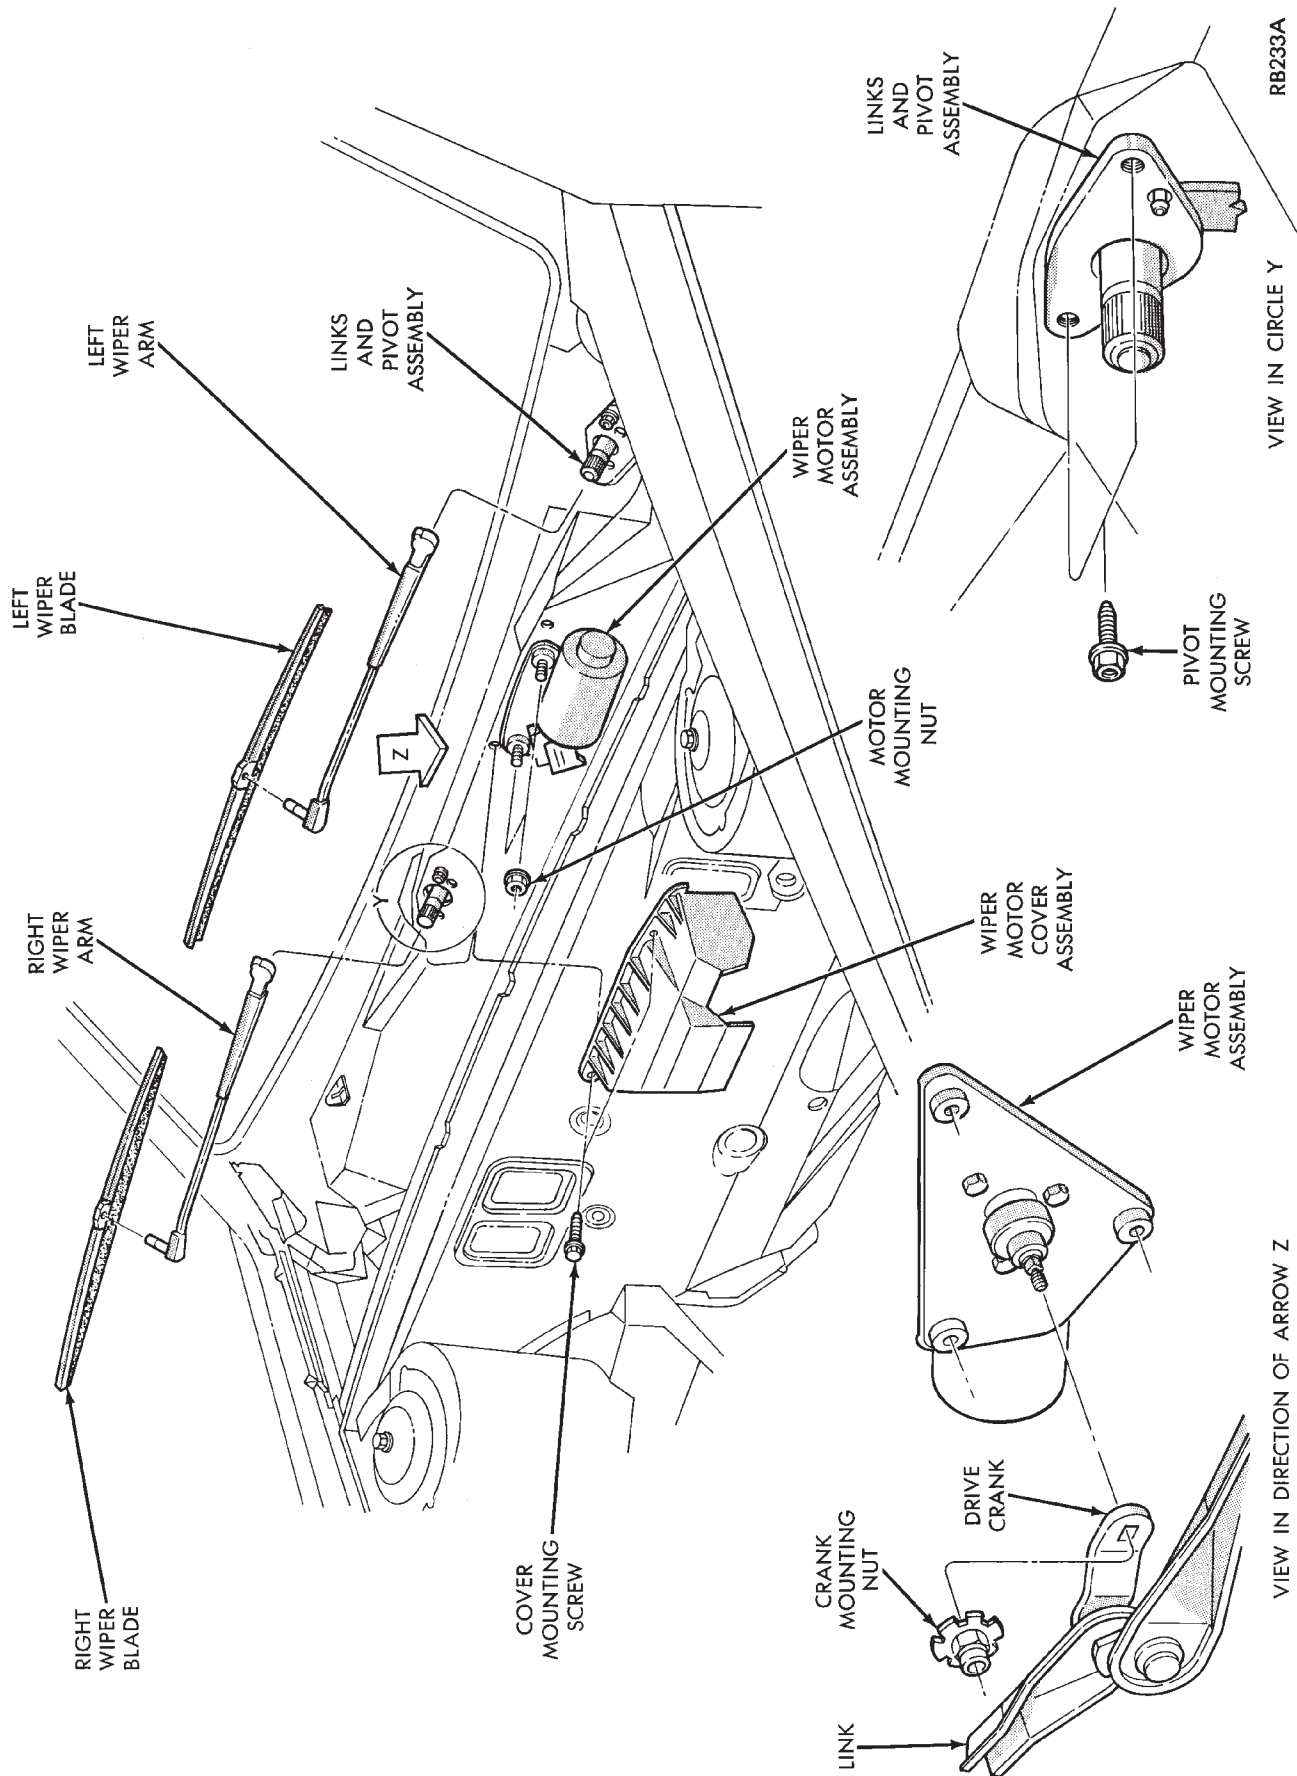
Windshield Wiper Motor and Linkage—AG and AJ Bodies
